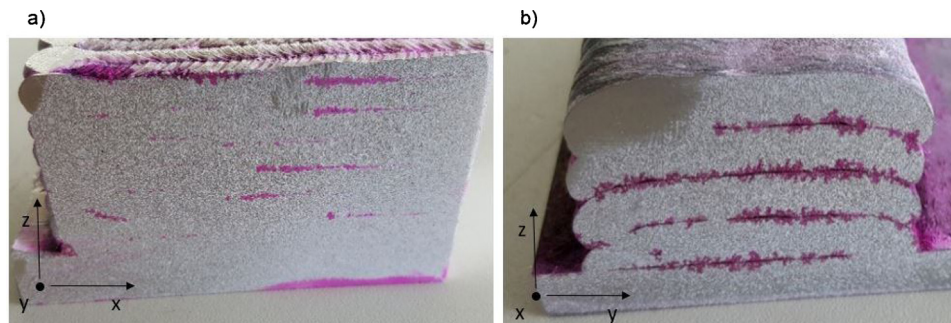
Cutting sections to confirm the X-ray NDT test results with dye penetrant to make defects more evident. (a) Aluminum and (b) Mild-steel.
